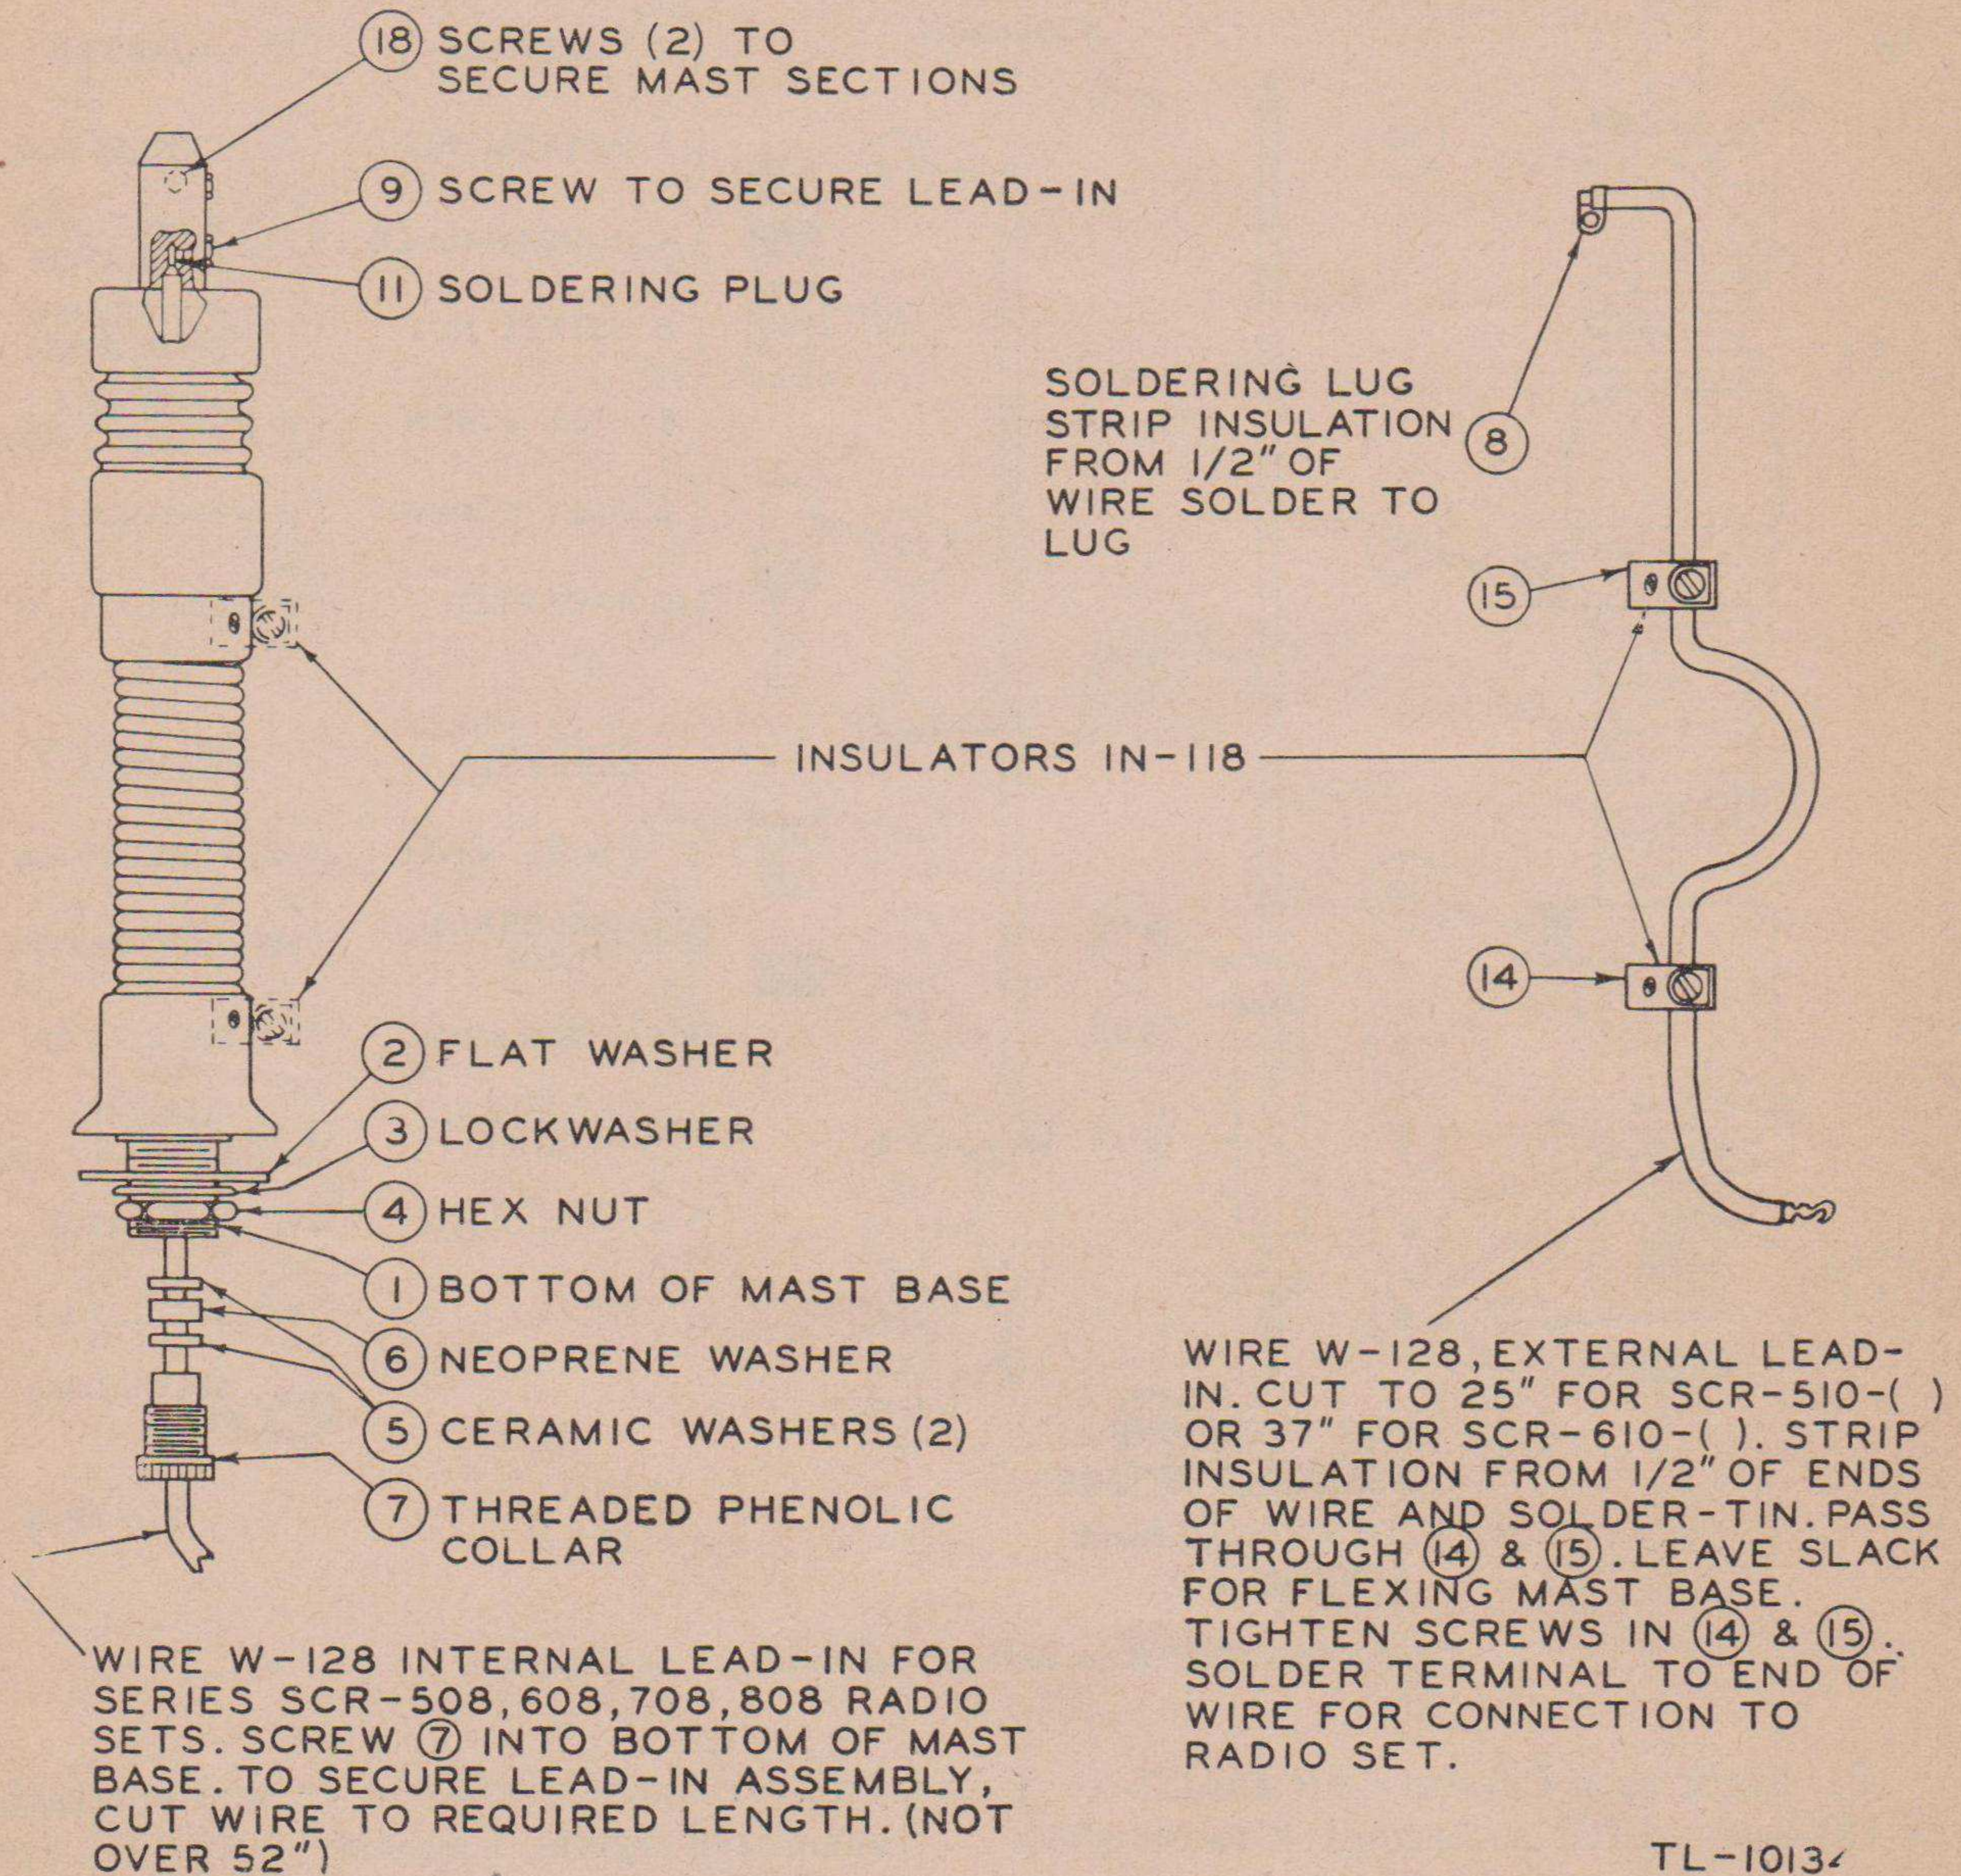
Mast Base MP-48-A, assembly with Wire W-128 lead-in.
